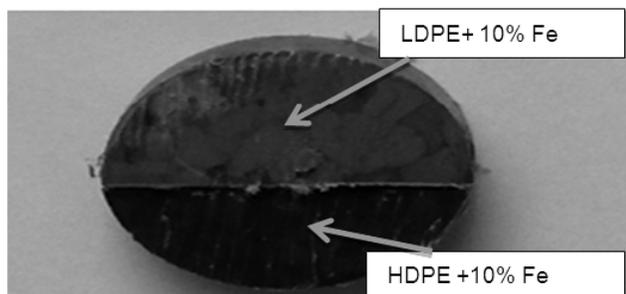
Friction stir welded LDPE-10%Fe and HDPE-10%Fe
